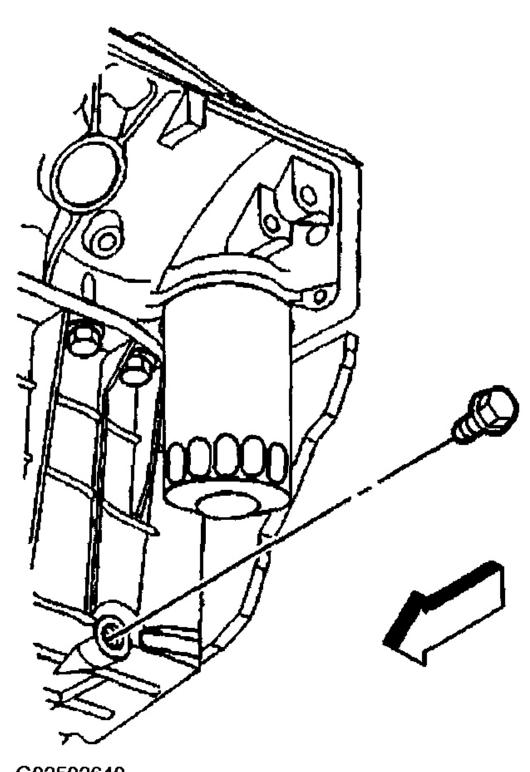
Installing Oil Cooler Pipes Bracket-To-Oil Pan Bolt Courtesy of GENERAL MOTORS CORP.
